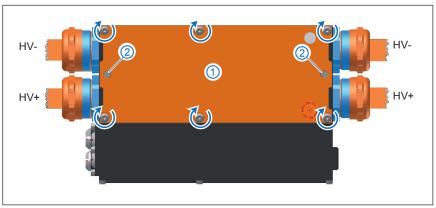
HV BM 1.2, HV power cables mounted, housing closed
